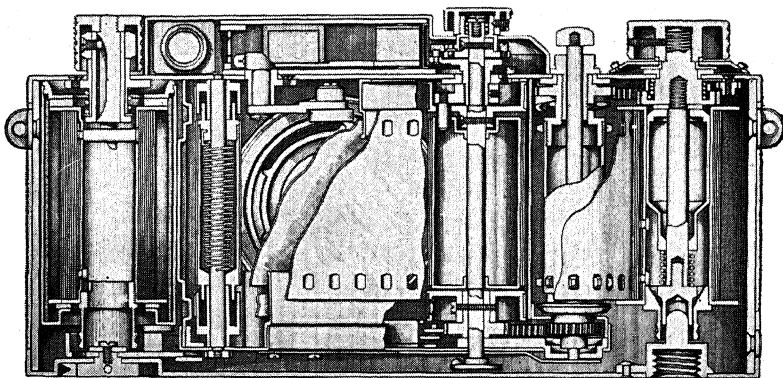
Back cross-section view of the Leica showing focal plane shutter, film, and all the actual working parts of the camera in cross-section.
